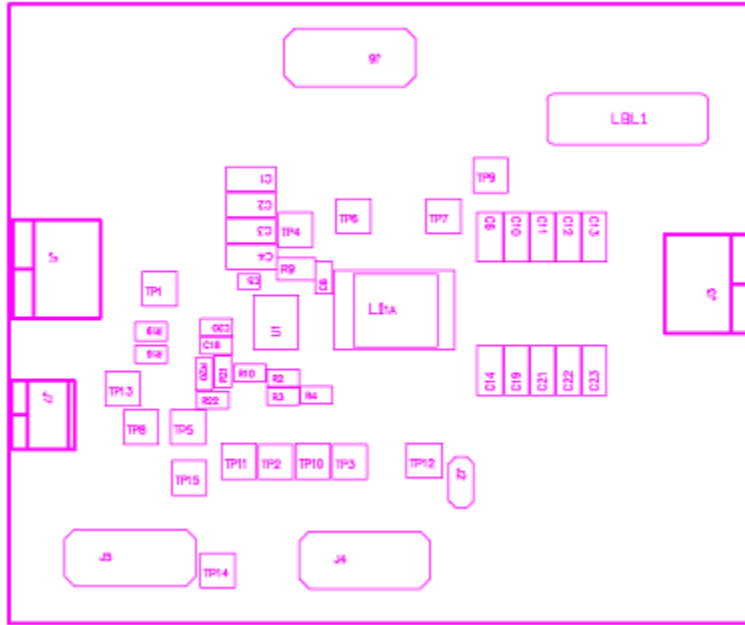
TPS53513EVM-587 Top Layer Assembly Drawing
